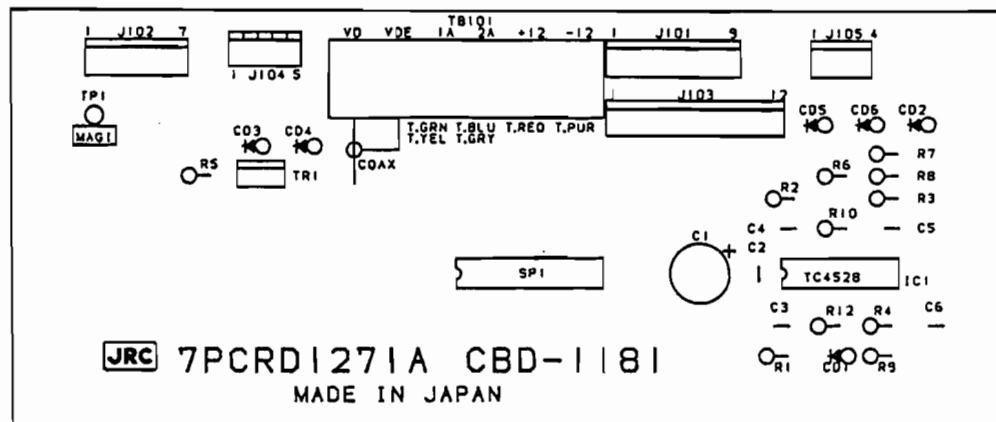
COMPONENT LOCATION DRAWING, R20XX TERMINAL PCB (CBD-1181)
